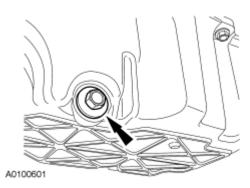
Locating Front Subframe Nuts Courtesy of FORD MOTOR CO.
